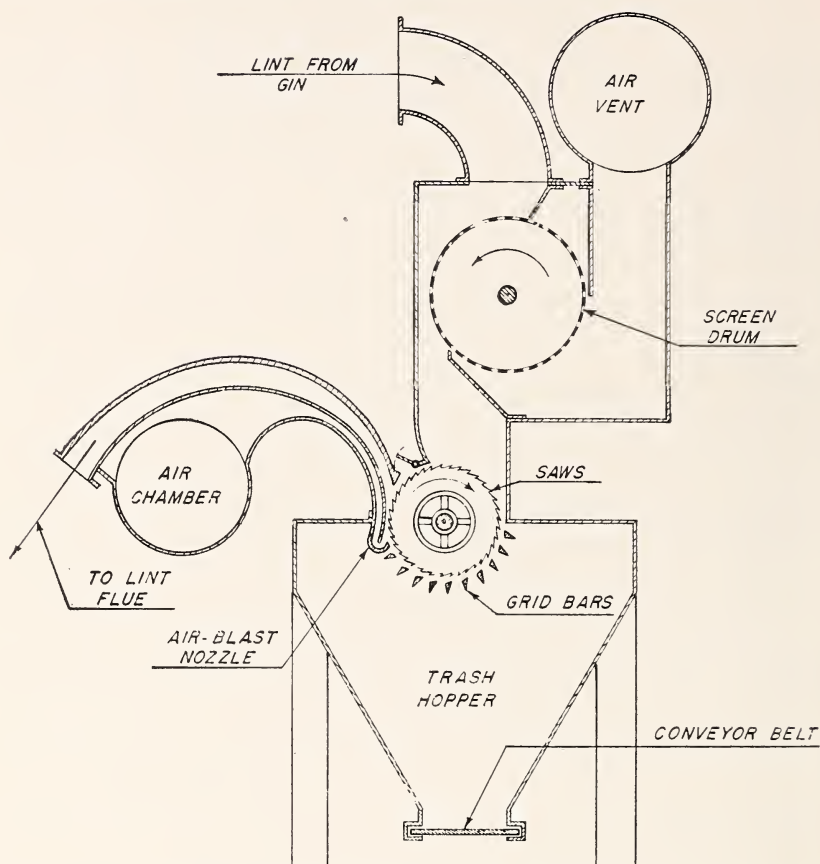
Cross sectional view of the final model of the lint cleaner designed by the U. S. Cotton Ginning Laboratory.
